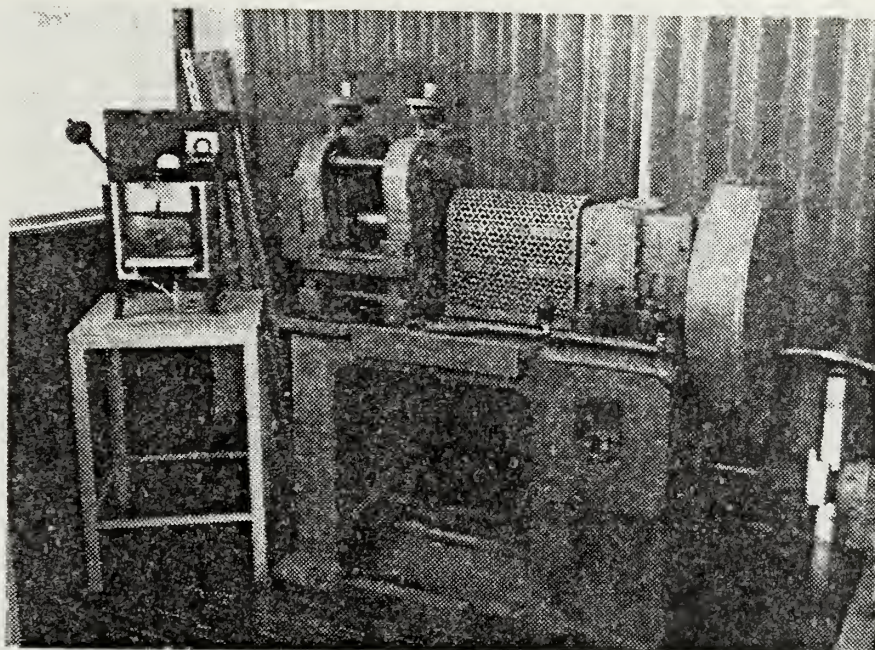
Furnace and Rolling Mill Used for Thermomechanical Processing
